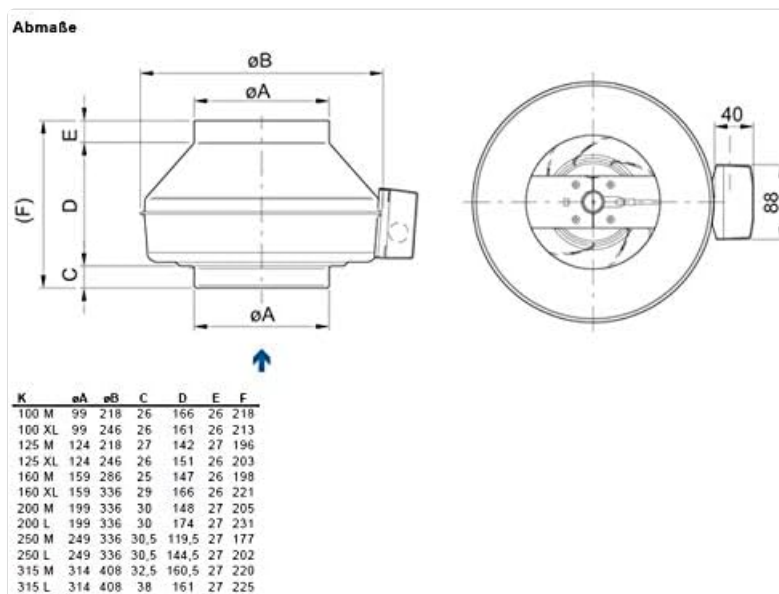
Dimensions Diagram. This technical drawing illustrates the various dimensions (A, B, C, D, E, F) of the fan, crucial for planning installation space and duct connections.
